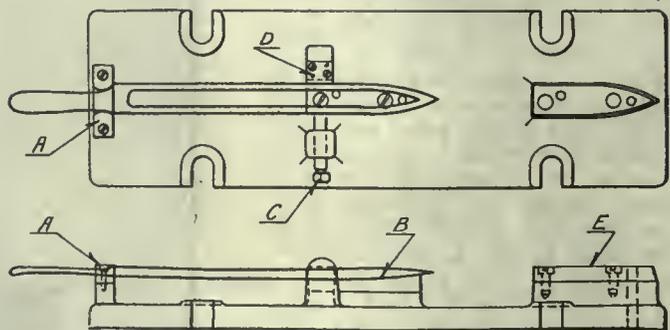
BAYONET POINT MILLING FIXTURE.
